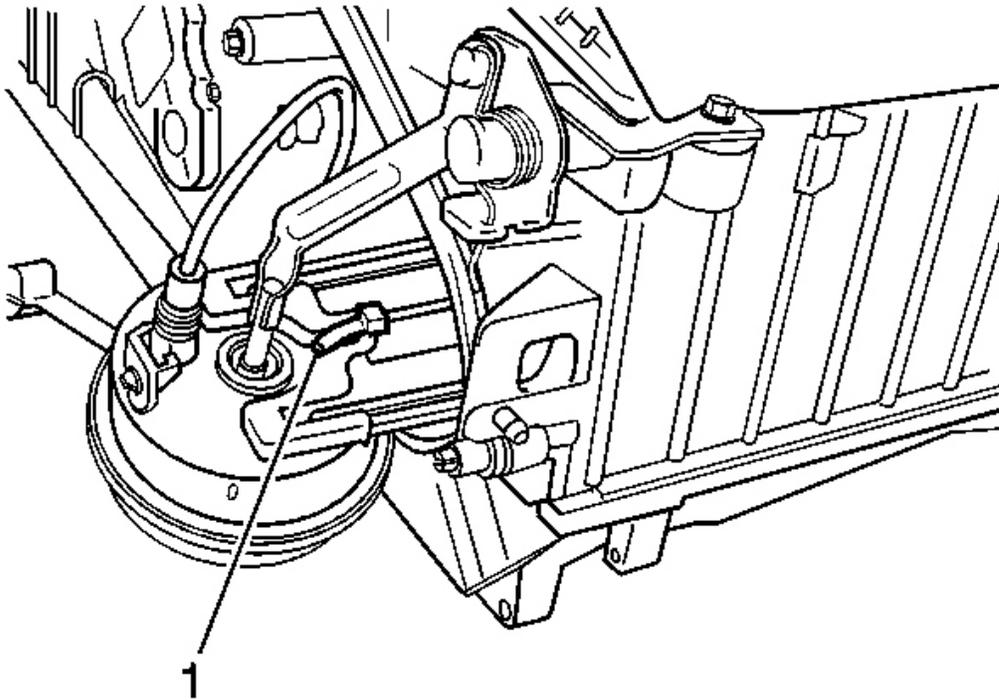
Mode Actuator & Vacuum Harness Connectors
